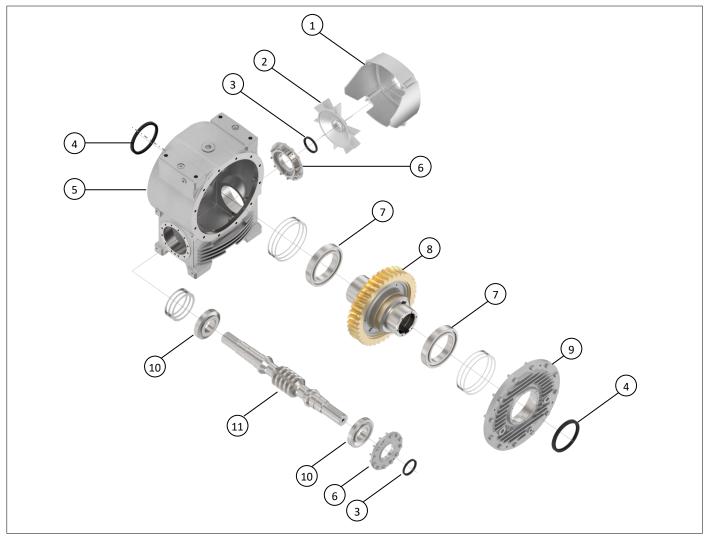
Exploded view for sizes S200.1 – S450.1
